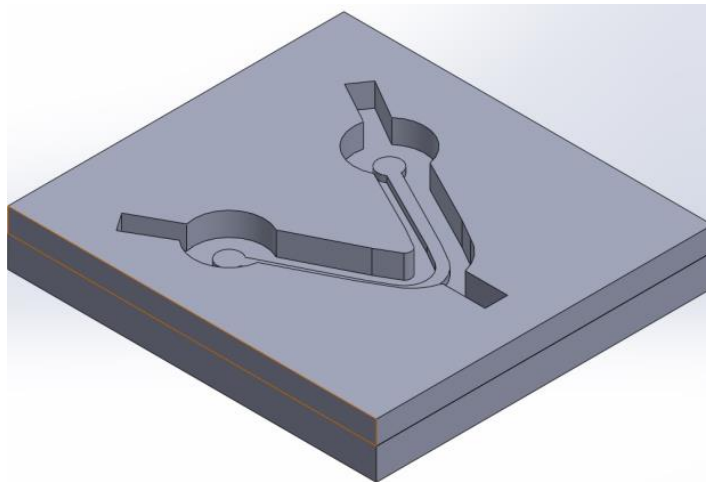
Straight Channel Master Mold Design for PCB Inductor
